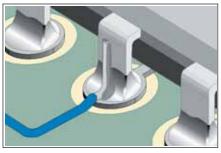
Acceptable Wire soldered parallel to lead on component side.
